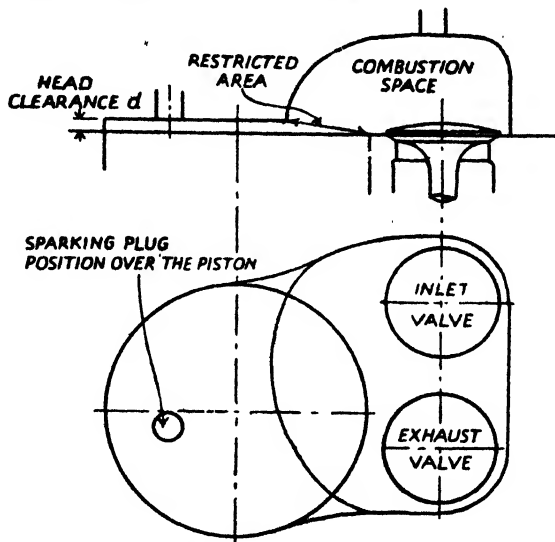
Elevation and plan of Ricardo 'turbulent head'.
